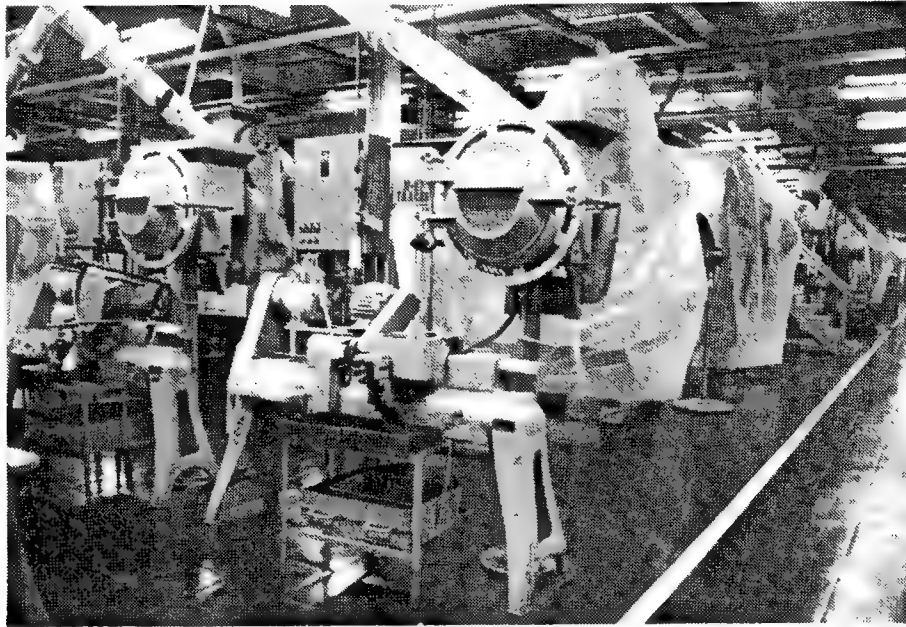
Building 3: Bullet Jacket Trim Machine manufactured by V & O Press.
